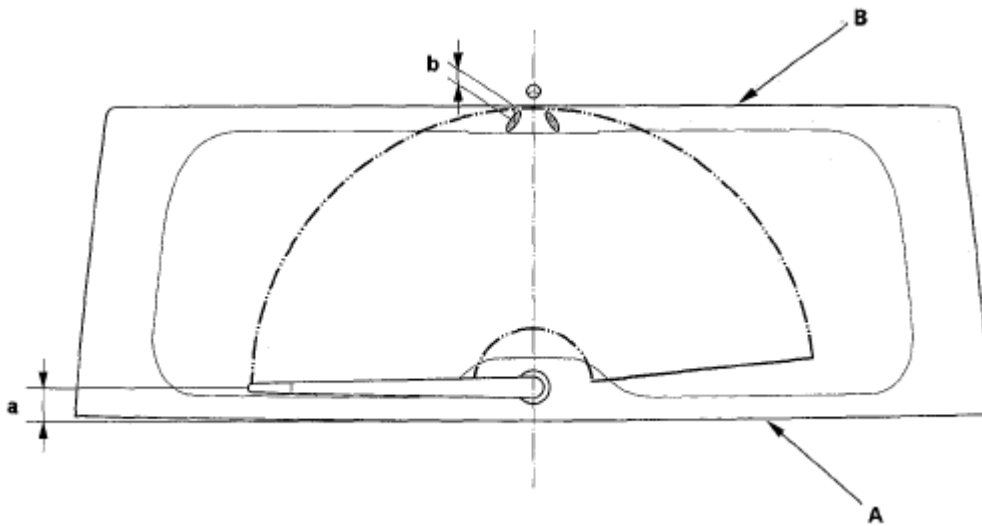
Identifying Wiper Arm/Nozzle Position - Rear
